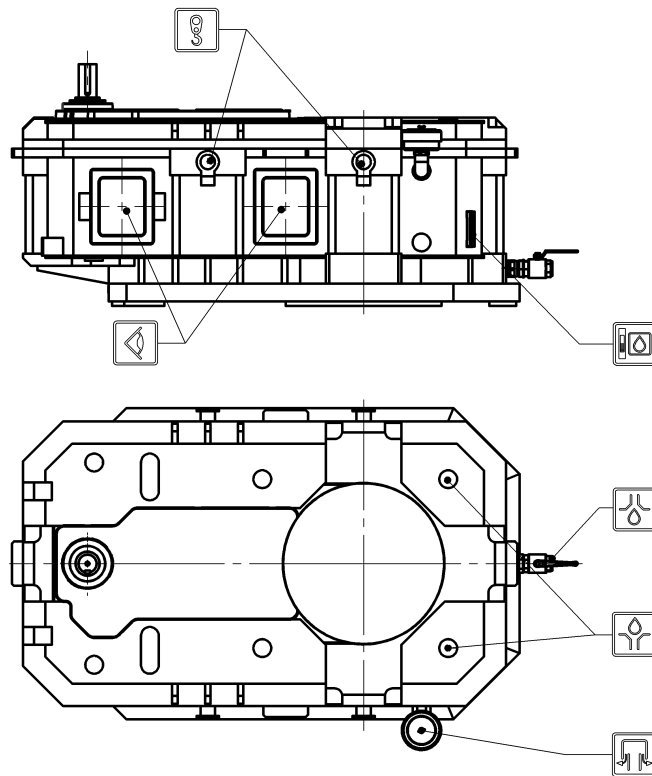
Symbols and mounting positions of ML..PV..N series gear units
